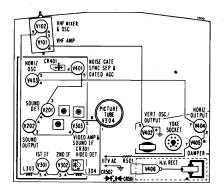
Rear View of Chassis 15UG1B Showing Adjustment Locations.
